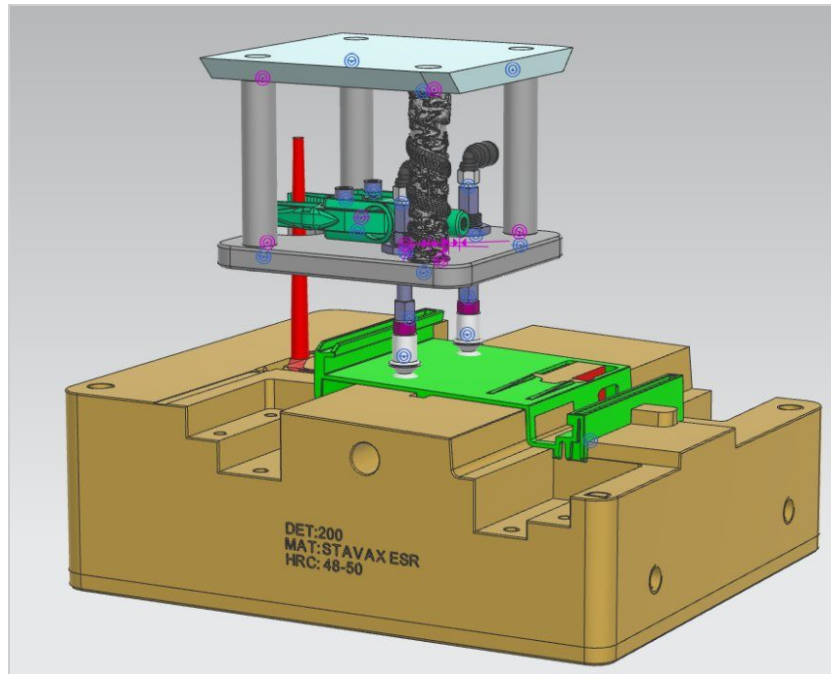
The second assembly seated over the hardened mold tooling, marked Stavax ESR at 48 to 50 HRC.
